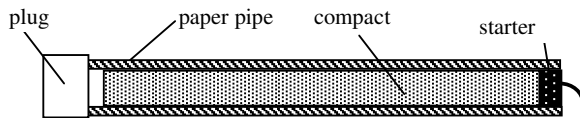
Schematic diagram of the non-electric welding pen of the pipe to seal the compact and serve as a grip when welding. The starter with a fuze is set in another end of the pipe to ignite the compact. The welding pen typically has an outer diameter of  $\phi$  16 mm~ $\phi$  25 mm, a length of 150 mm~600 mm. When ignited by a match, the starter starts the combustion of the compact and a great heat is released which melts part of the objects and the resultant metals from the reaction. Then a metallurgic
